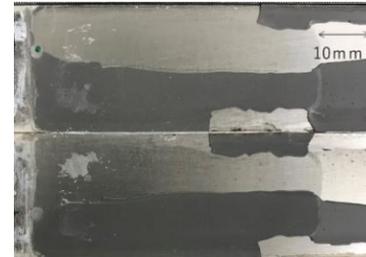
Fracture surface of specimen with dripping 30 day (60°C)
